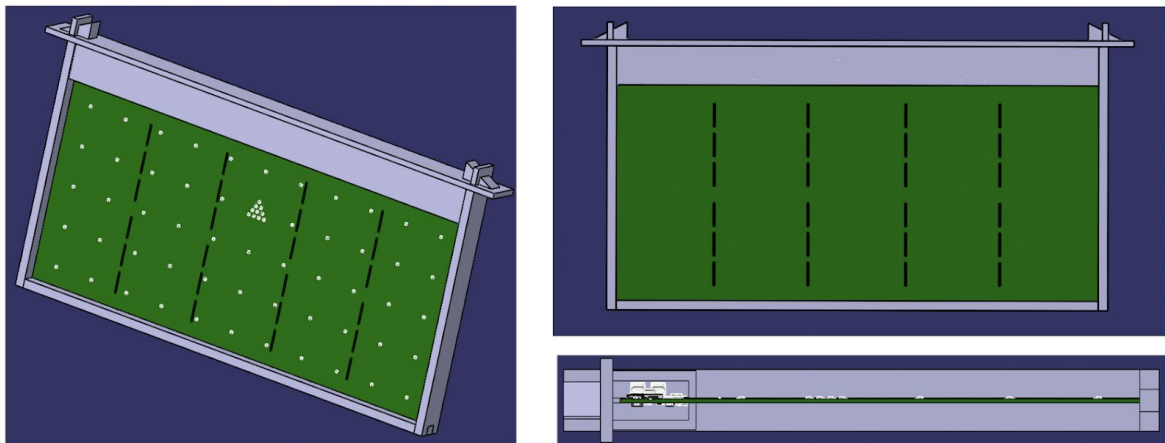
Mechanical design for frame housing : (a) Perspective (left), (b) front view (top-right) and (c) side cutaway (bottom right).
